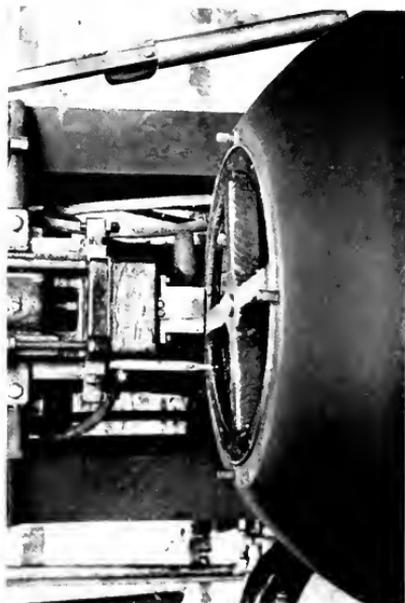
Spot-welding Machine Welding Studs to a Naval Mine
